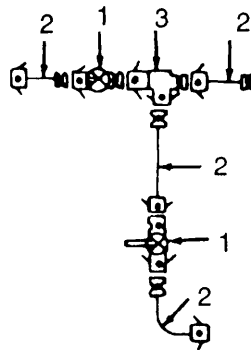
Butterfly Valve Assembly, Removal/Installation.
